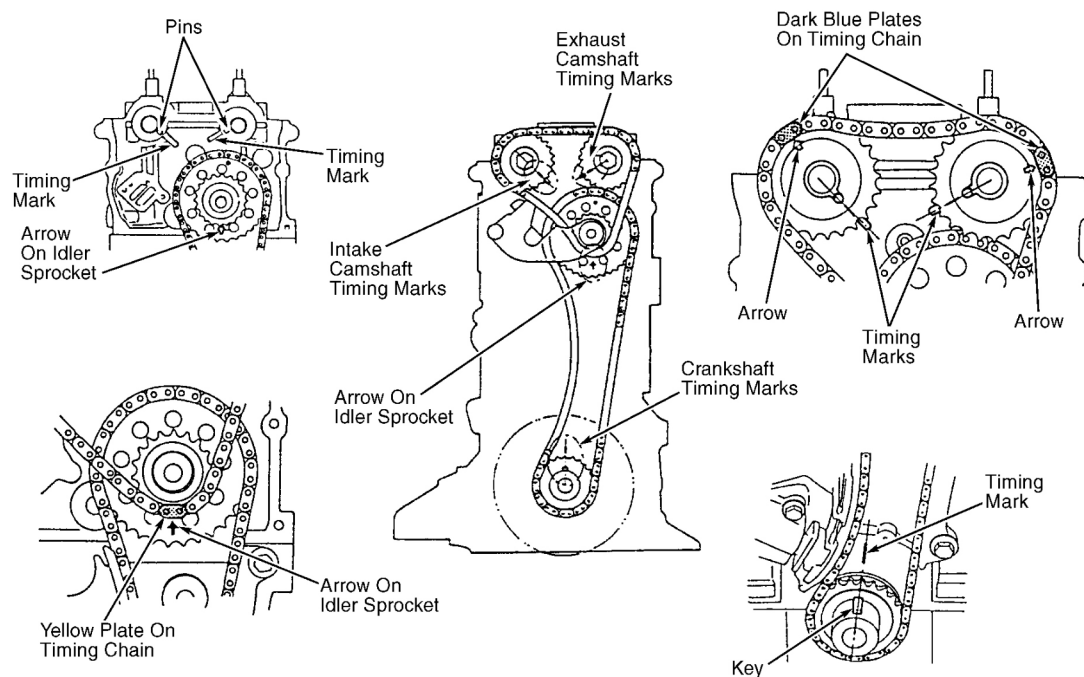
Aligning 2nd Timing Chain & Sprockets
